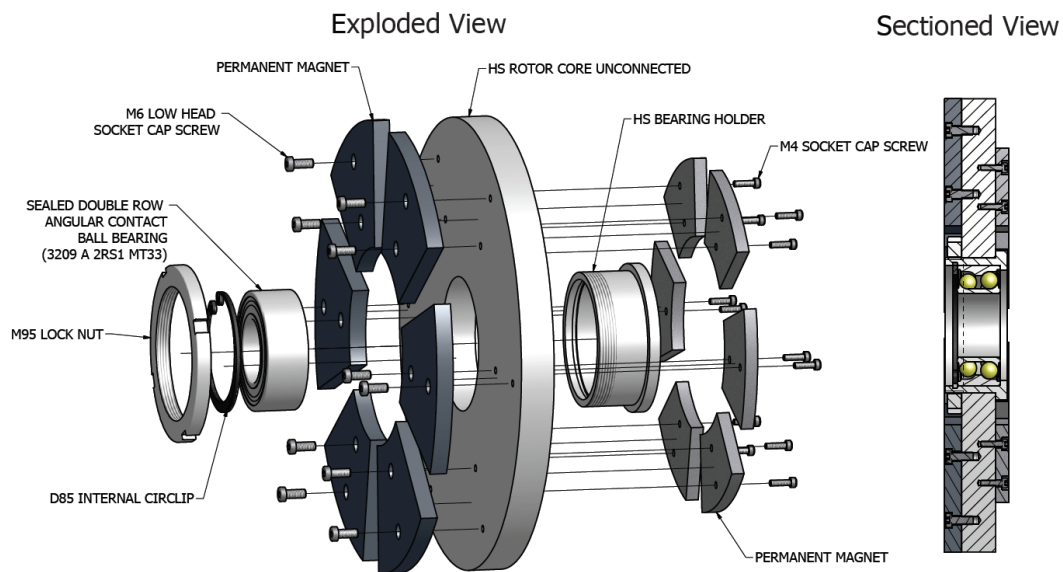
High-Speed Rotor with Exploded and Sectioned Views (Magnetically Uncoupled)
